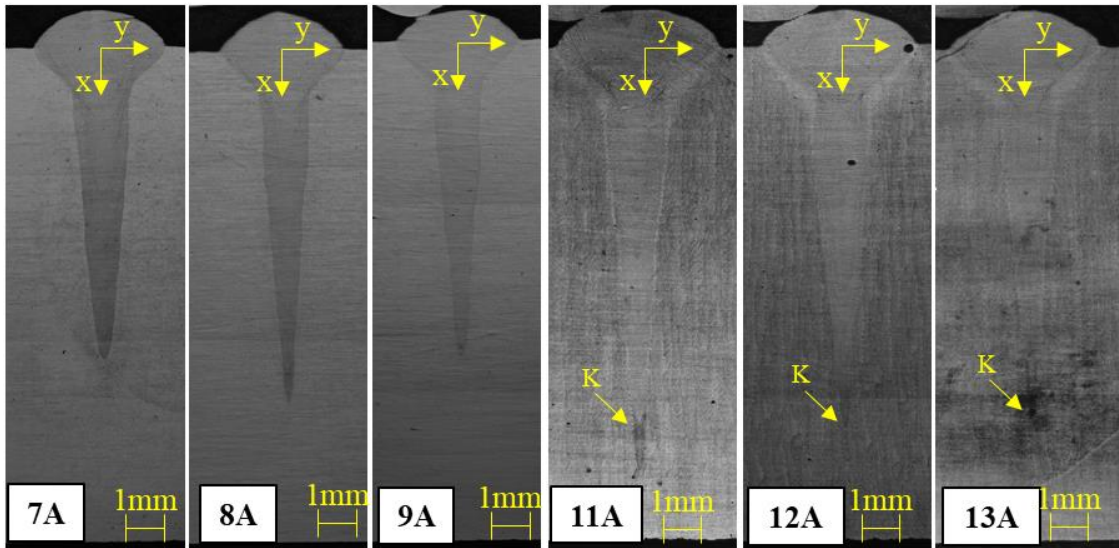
Weld Geometry for SLM+HIP+EBW samples 7A to 9A and SLM+EBW samples 11A to 13A; K – Keyhole root void
